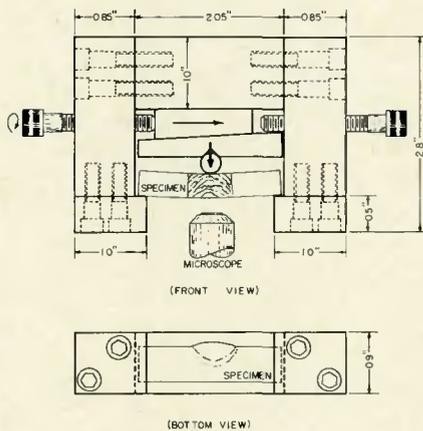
Detailed drawing of the loading apparatus used to stress specimens in the cold cracking test
